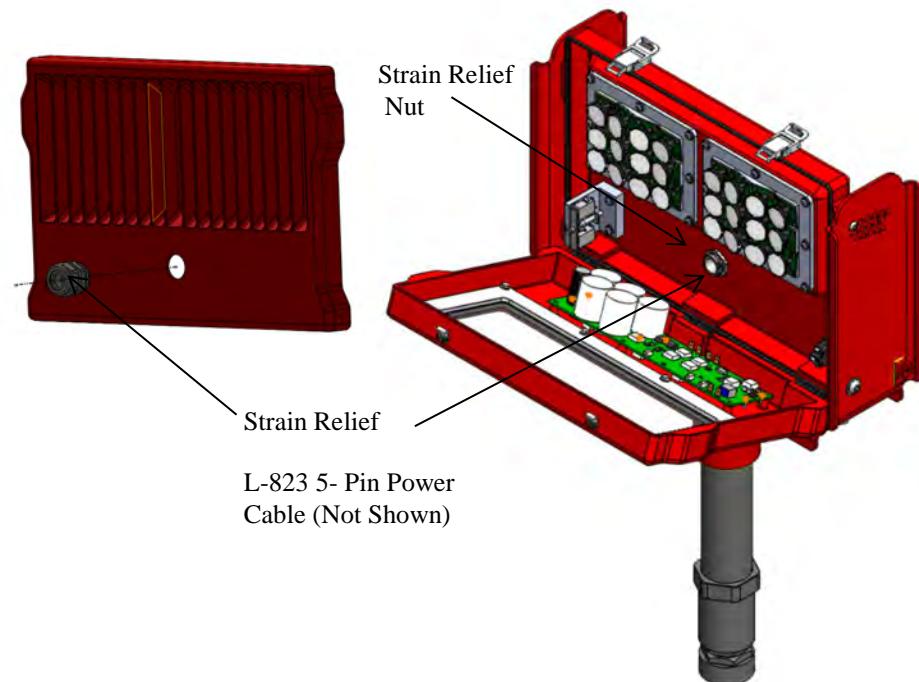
L-823 5-Pin Power Cable & Strain Relief
